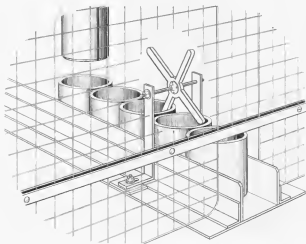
The feed chute to a drawing tool. The guard is shown cut away to illustrate the simple method of ensuring that cup shaped components are not fed in upside down; this also prevents a hand from reaching the danger area when no components are in the chute.
